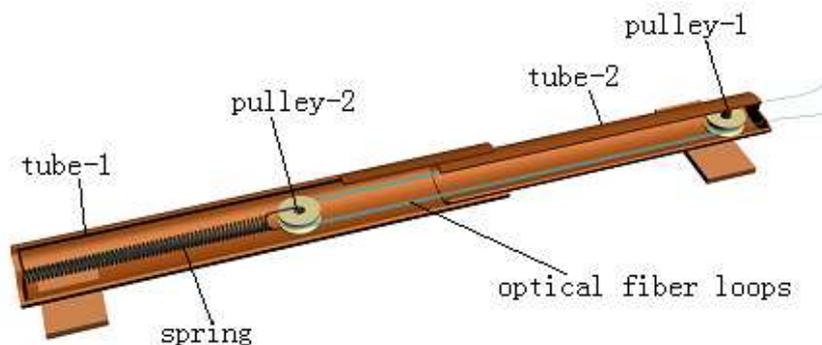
Packaging structure of fiber optical Brillouin displacement sensor.
